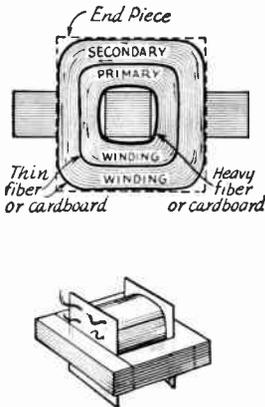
A convenient method of assembling the windings of a shell-type core. Windings can be similarly mounted on core-type cores, in which case the coils are placed on one of the sides. High-voltage core-type transformers sometimes are made with the primary on one core leg and the secondary on the opposite.
